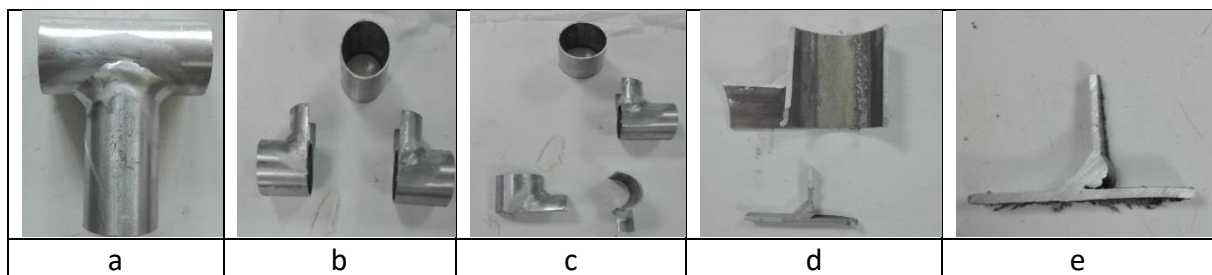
Cutting process of the 7005-t1 welding a) isolation of the welding b) cut the welding in two samples to reveal the inside surface c) Quarter cut the previous samples in order to make it easier to handle d) final cut before boxing e) final sample isolated.
